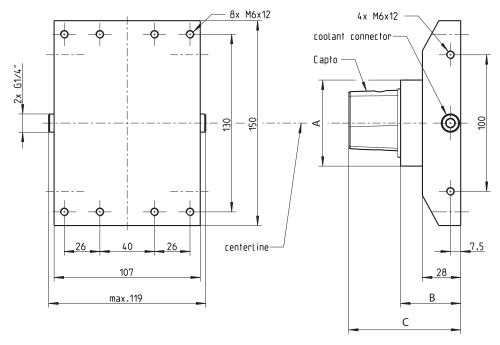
Machine adapter with Capto C... for disk-type turret with Coromant Capto clamping unit, Type 9129AC...
